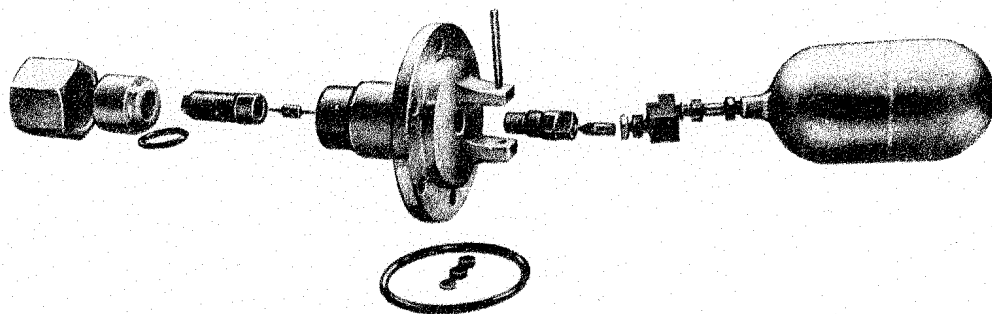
EXPLODED VIEW OF FLOAT VALVE
